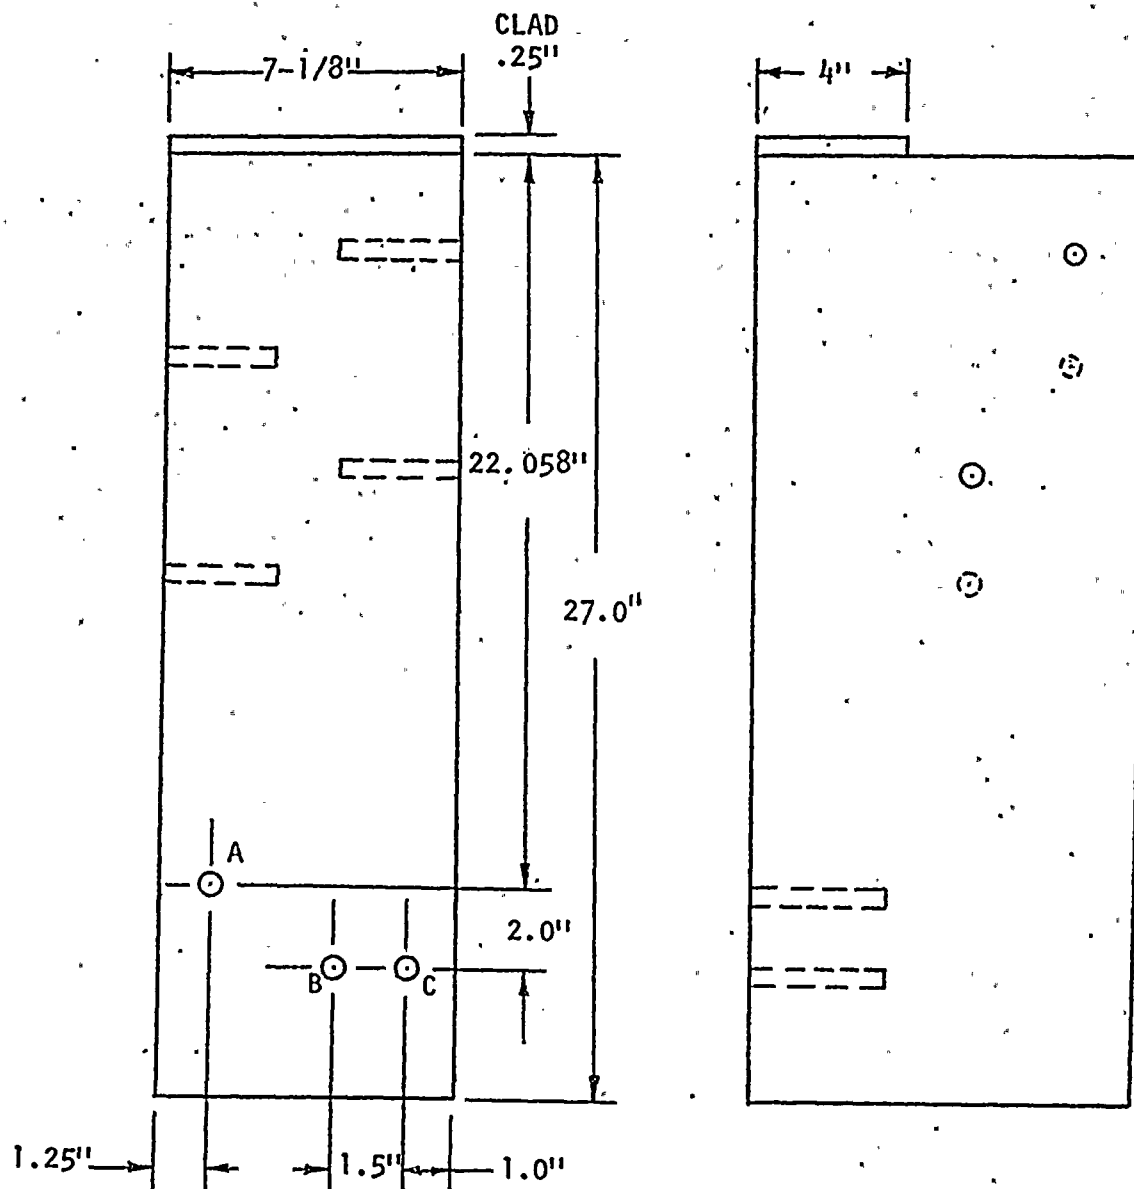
Ultrasonic Examination of Reactor Vessel to Flange Weld
